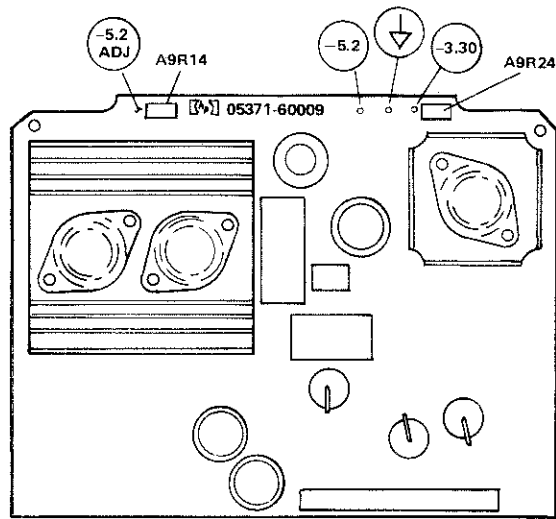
C. A9 Double Regulator Board Adjustment Locator
